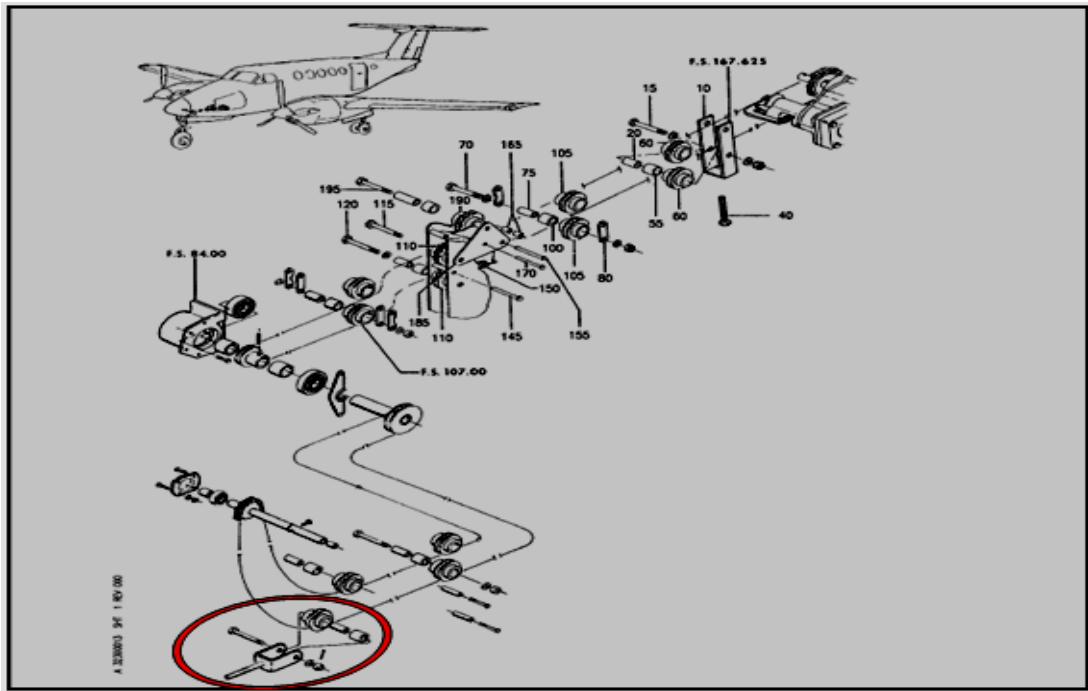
Schematic of illustrated parts of the nose gear retraction mechanism
